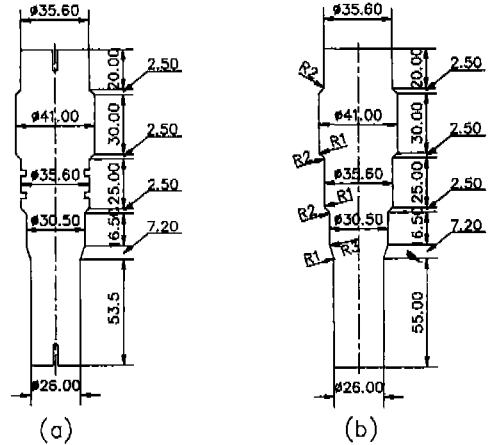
An example of forging design:(a) assembly ready part;and(b) cold forgeable part.
